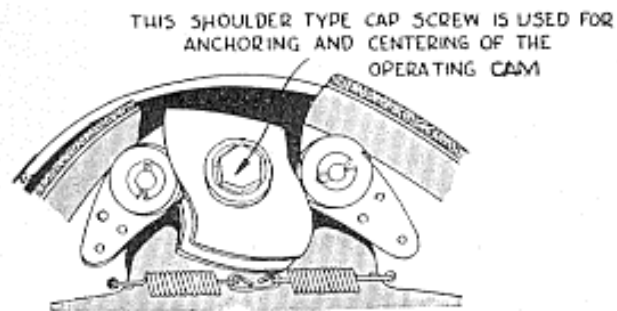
Self-centering cam assembly as used on some Bendix installations
